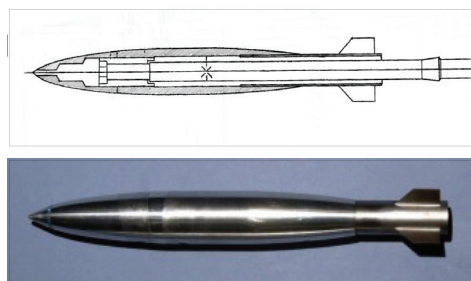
After-Body Distortion of Scale-down Wind Tunnel Test Model. (Above) Cross Section of Wind Tunnel TeMetric Shell of Wind Tunnel Test Model
